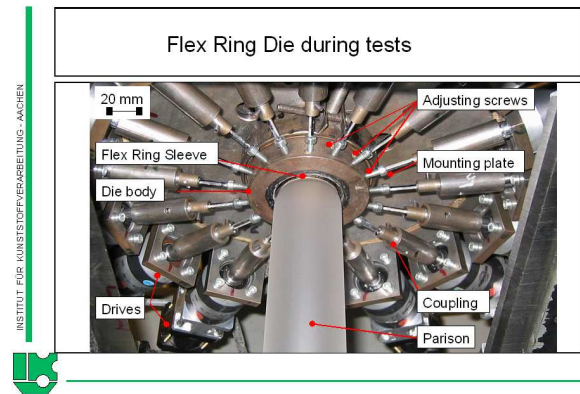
Flex ring die of the IKV with a diameter of 35 mm which is equipped with 16 actuating motors (source IKV [2])
